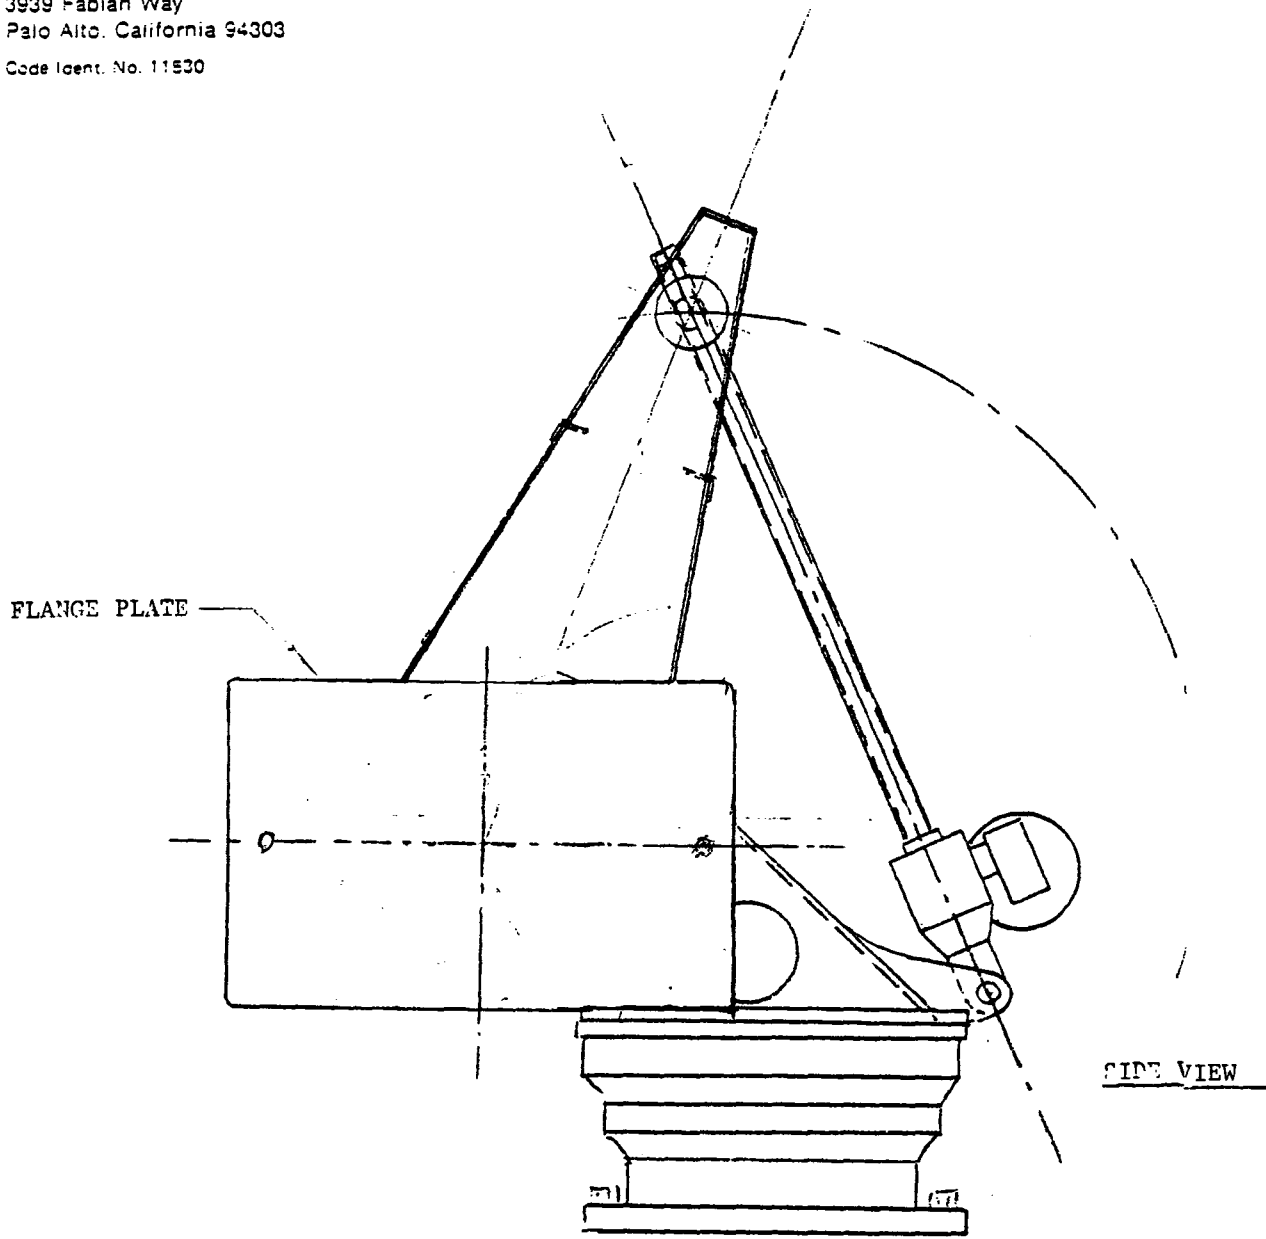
ELEVATION DRIVE TRAVEL LIMITS
